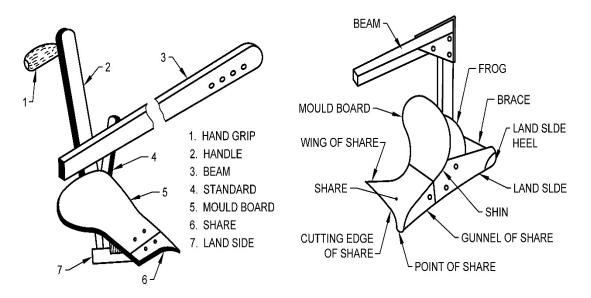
COMPONENTS OF ANIMAL DRAWN MOULD BOARD PLOUGH
